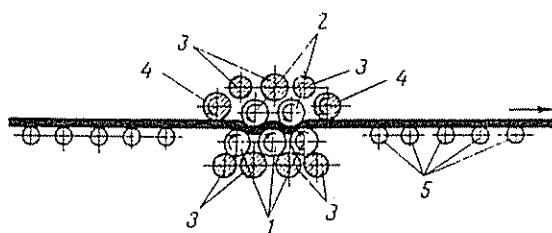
Diagram illustrating plate being straightened in roll-straightener. 1—lower work rolls; 2—upper work rolls; 3—back-up rolls; 4—auxiliary rolls; 5—roller table.
